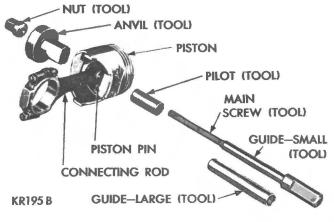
Tool arrangement for removing piston pin (Tool CA-3724).
